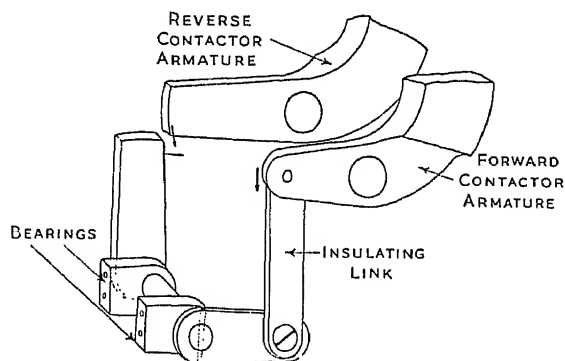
Positive mechanical interlock for reversing contactors (panel omitted); by the General Electric Co., Ltd.
